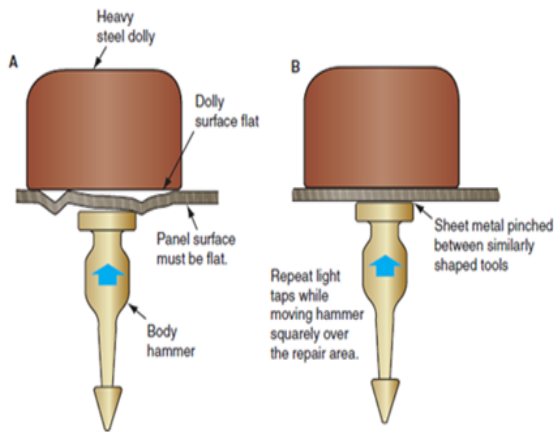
A body hammer is often used in conjunction with a dolly block. (A) Dolly block is being held on rear of the body panel while the body hammer is used to straighten and repair damage from the front. (B) Dolly acts as a small anvil to hold the bent panel secure from the rear. The body hammer can then strike the bent panel to straighten it.
